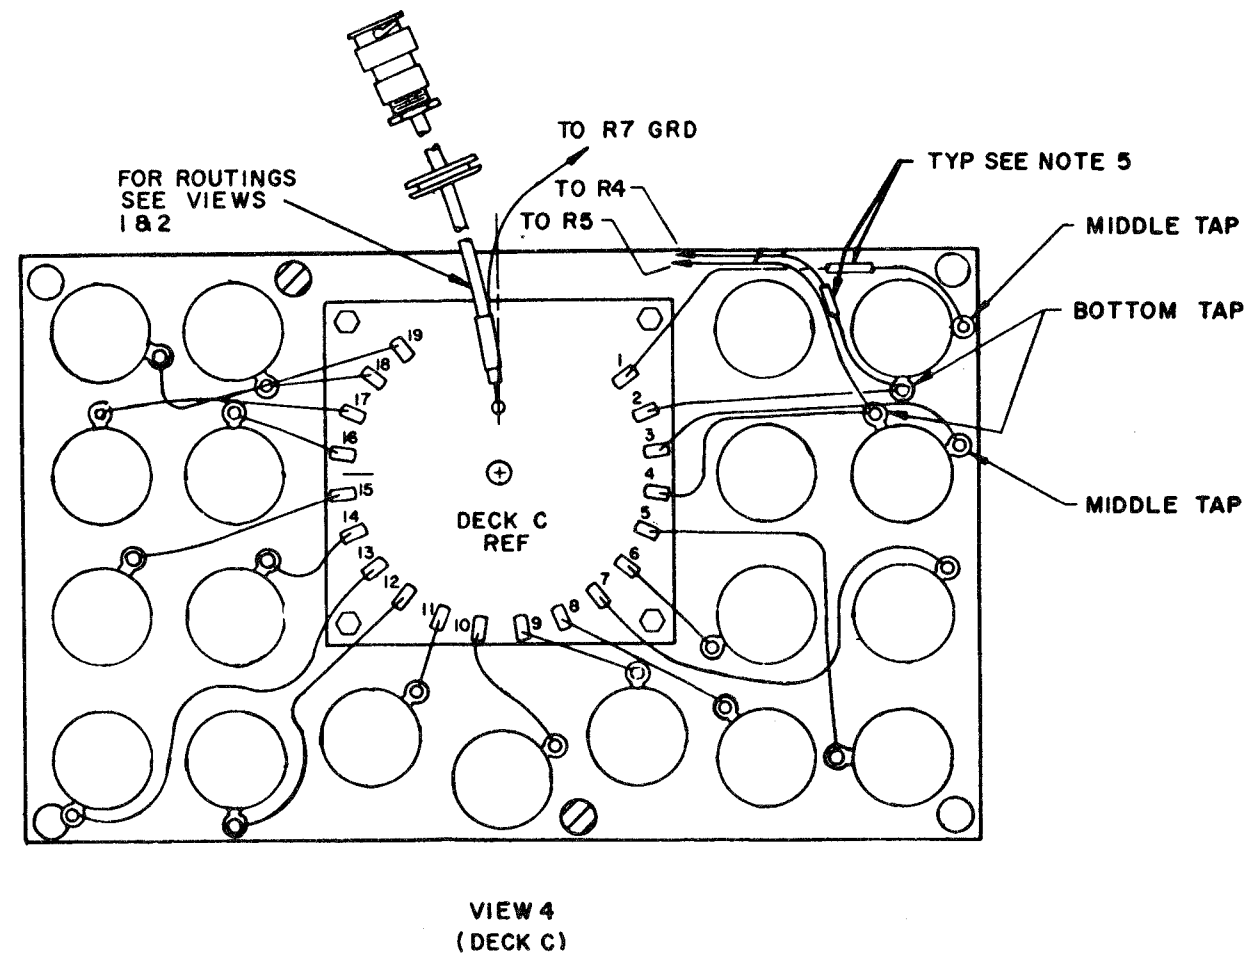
Final Transformer Assembly 1A1A2, Component and Test Point Locations (Sheet 2 of 2)
